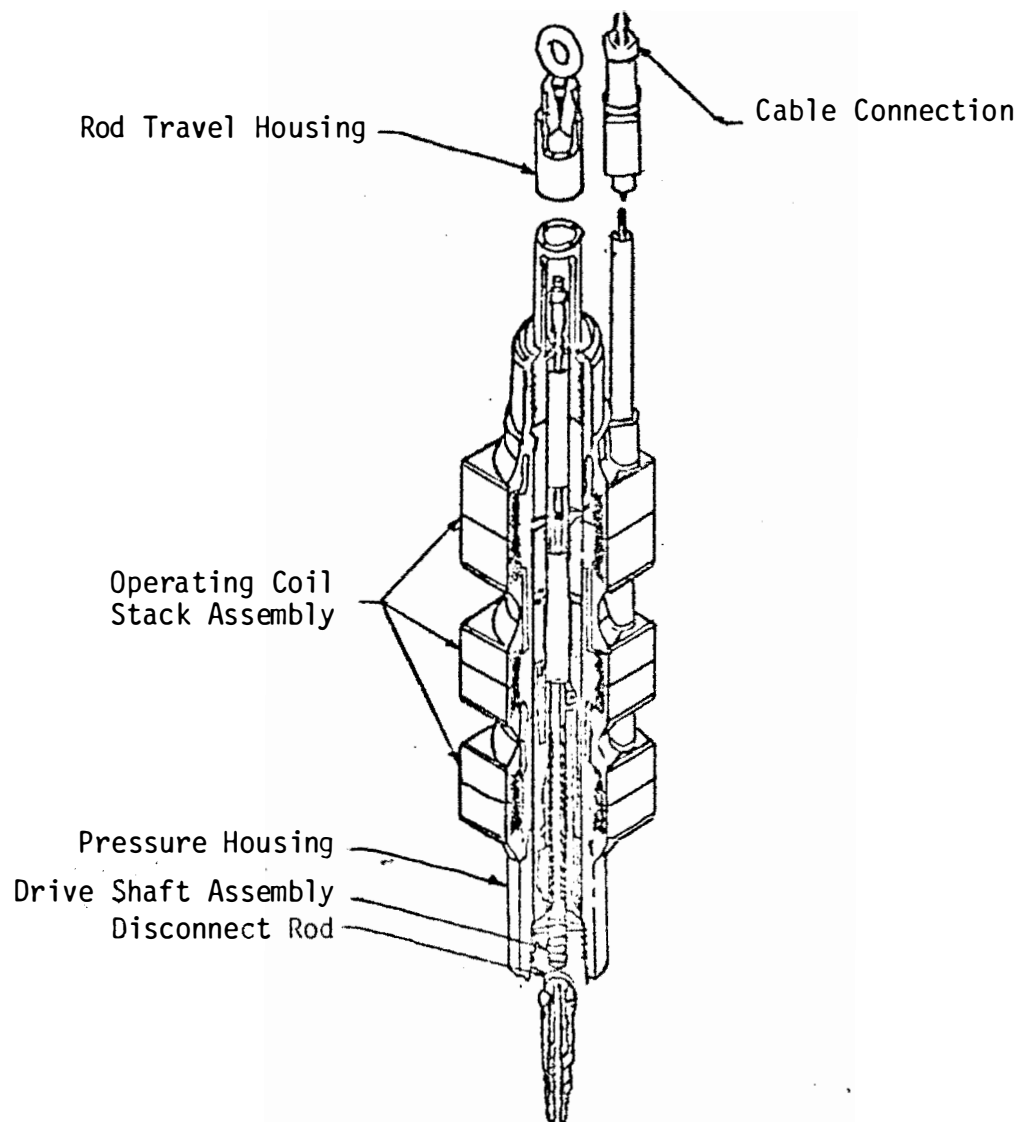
Rod Cluster Control Drive Mechanism Assembly.
